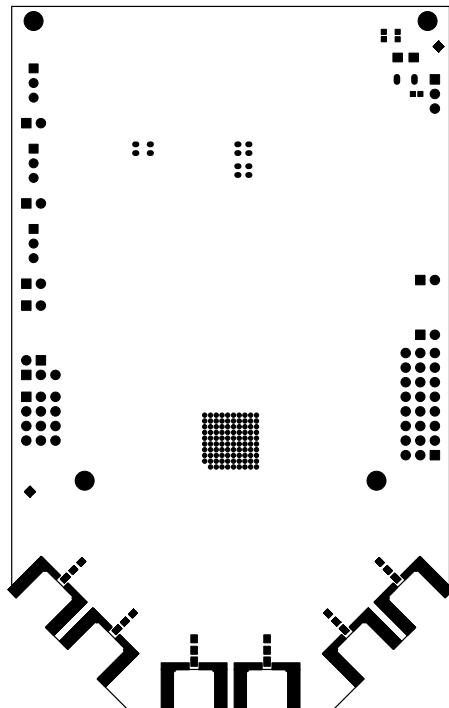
Si5110-EVB Solder Side Assembly (Daughter Card)
